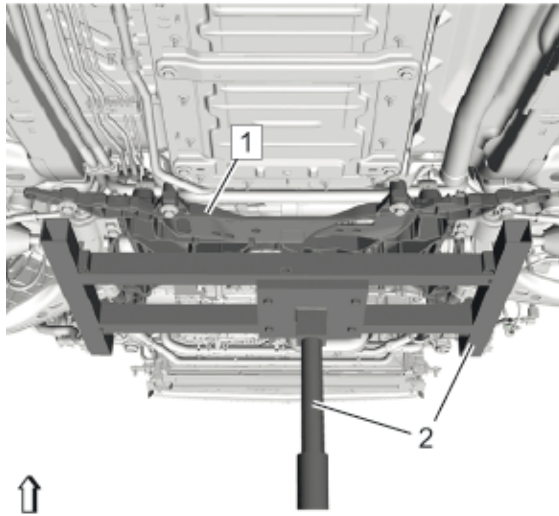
Drivetrain And Front Suspension Cradle Supported With Suitable Hydraulic Jack
